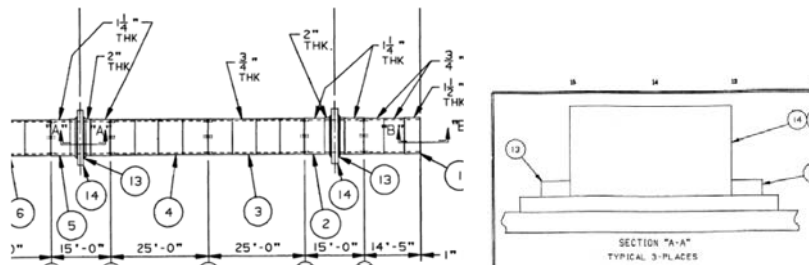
Shell with filler bars – 1982 designed kiln – this figure shows the typical mounting of the tire on the filler bar assembly.
